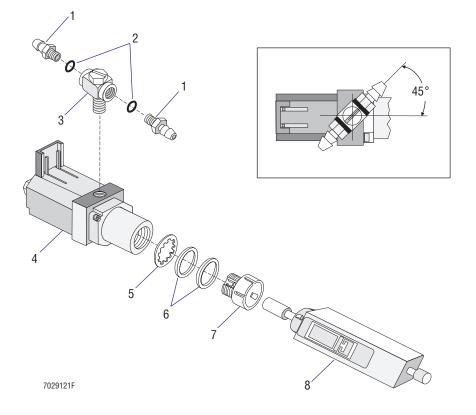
VL22 - Exploded View of Upper Valve (See Table 8.2-15)
